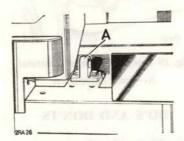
Lifting and towing ring, front illustrated A-Lifting and towing ring
